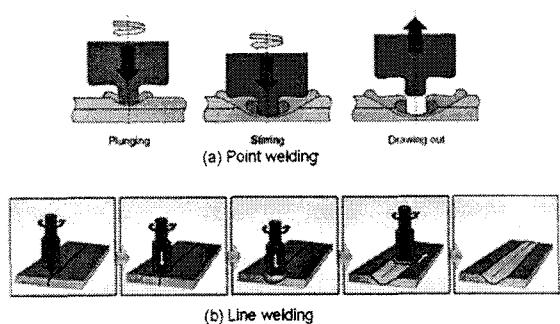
Visual schematic of the three-step friction stir spot welding process
